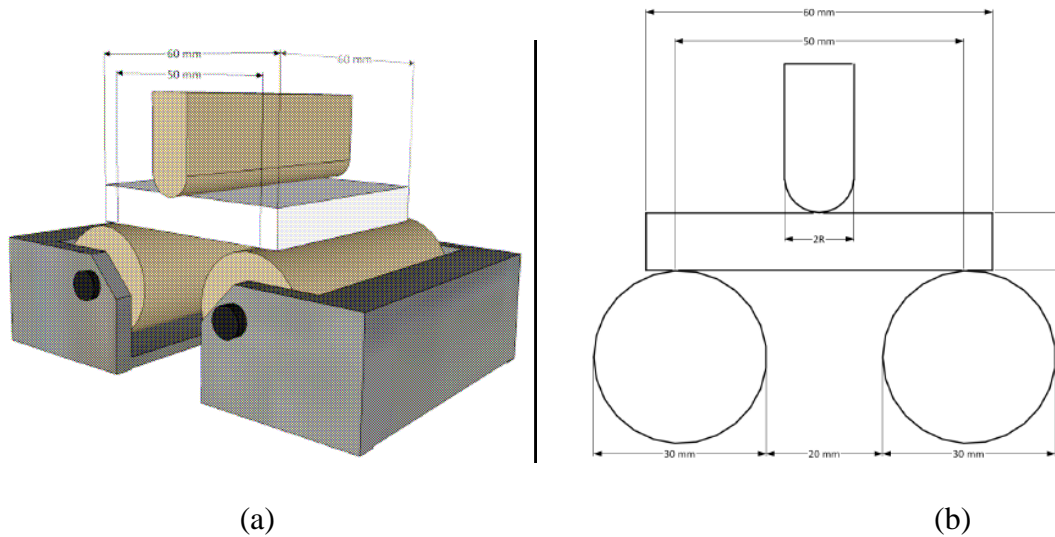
Set-up for three-point bending tests [8]. (a) 3D sketch. (b) Drawing with dimensions.
